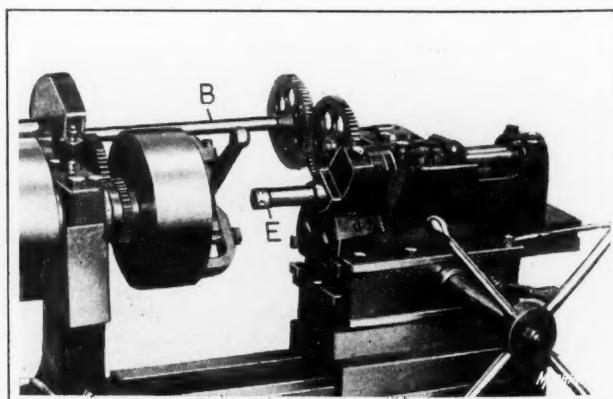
Another View of the Tooling Equipment for boring Automobile Connecting-rods
